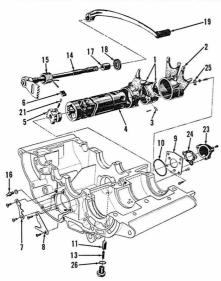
Exploded view of six speed gear shifter assembly used on X-6 models.
